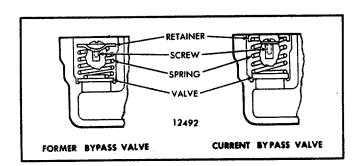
Bypass Valve Assembly Secured by Retainer and Screw
